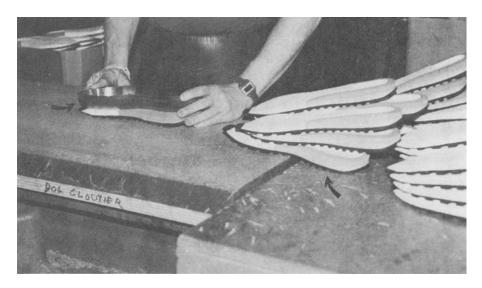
Premolded outsoles have been glued to a white midsole to form a blocker. The blocker is then die cut into the proper shape and size. Its edge may then be ground down to give it a beveled or wedge shape.
